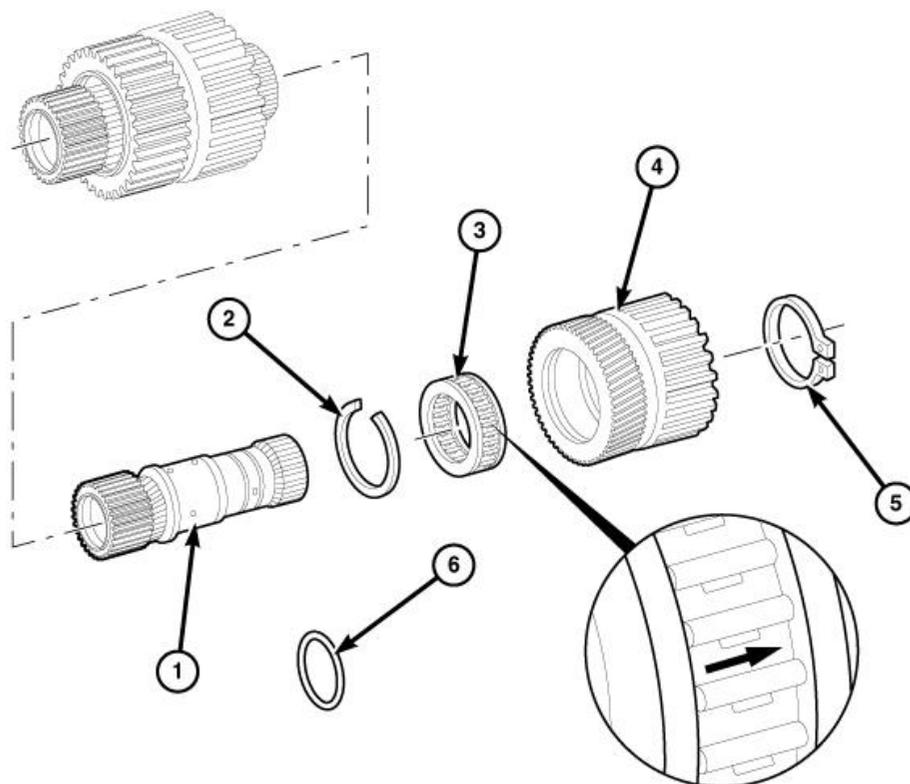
Freewheeling Clutch F2 Anti-Friction Bearing
